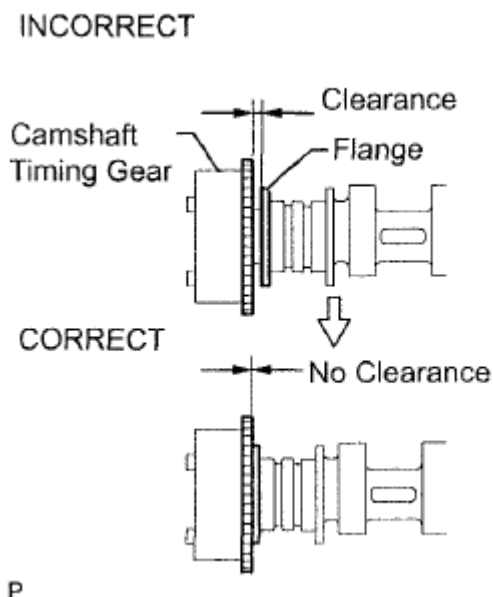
Identifying Clearance Between Camshaft Timing Gear And Camshaft Flange
